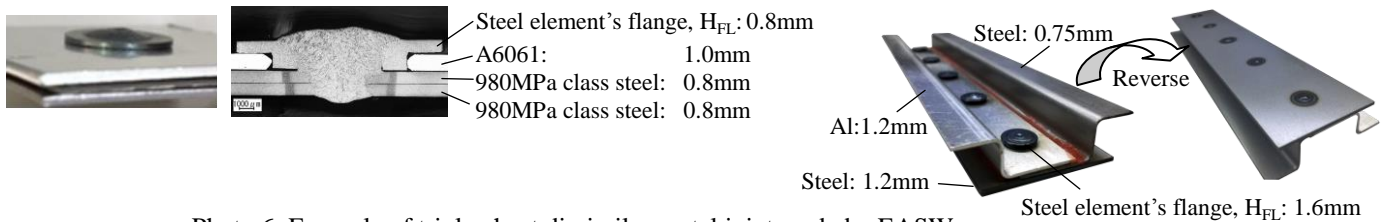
Example of triple-sheet dissimilar-metal joint made by EASW
